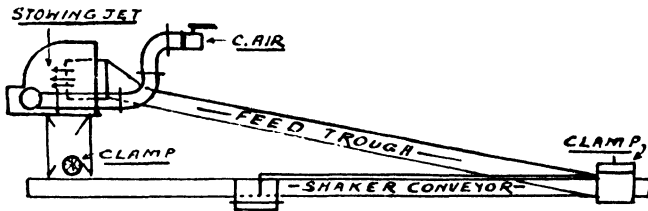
Attachment of Meco Stowing-machine Jet.
